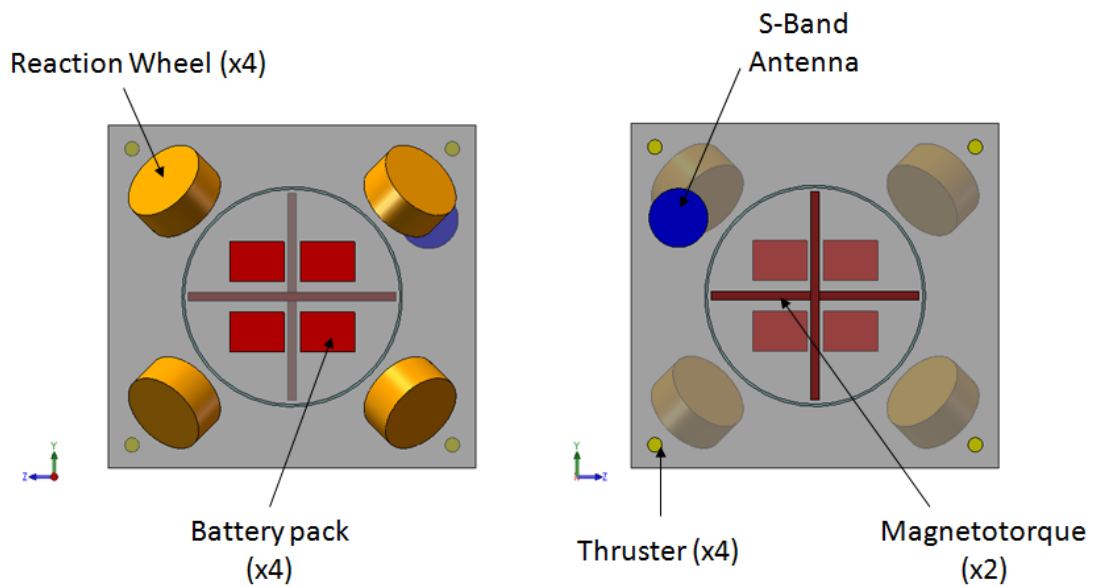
SM Lower Panel side view of GSST satellite, showing equipment layout for OPC3-2.
